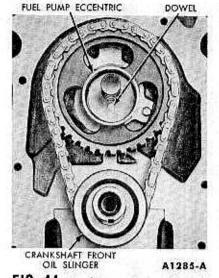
Fuel Pump Eccentric and Front Oil Slinger Installed
